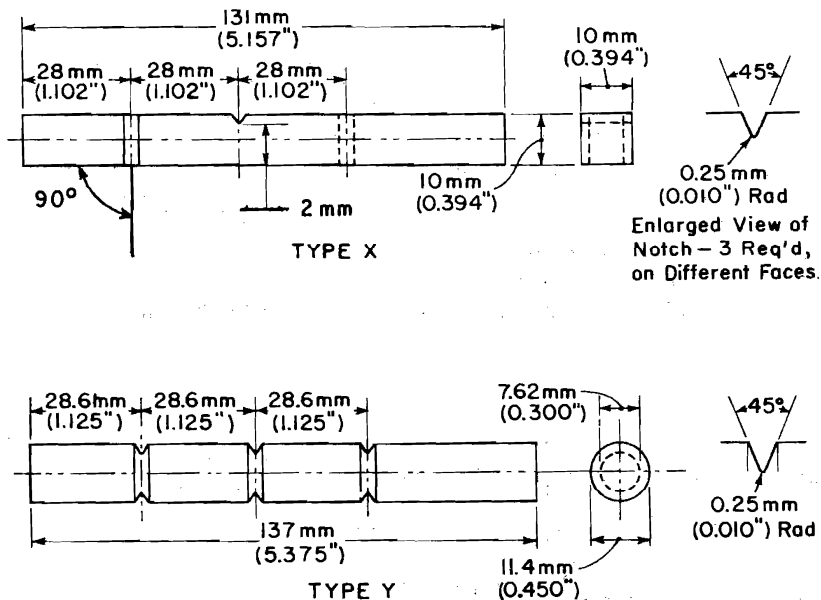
Charpy (Simple Beam) Impact Test Specimens for Metal Powder Structural Parts
